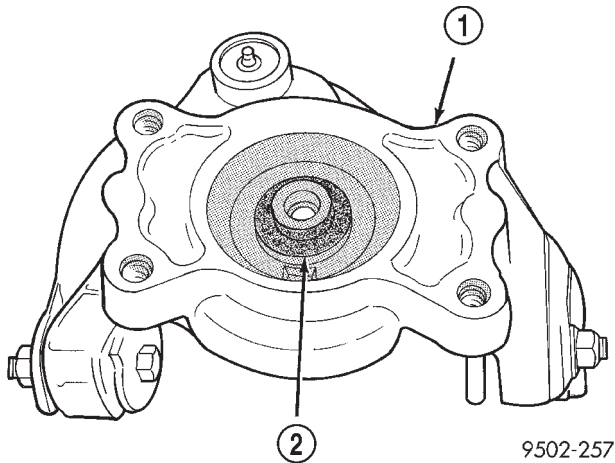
Shock Absorber Rod Upper Isolator Bushing
